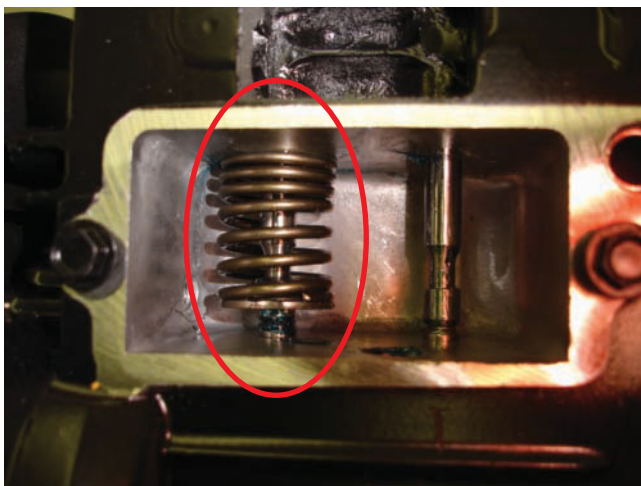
The narrow pitch of the spring sits on the nonmoving surface of the engine.
